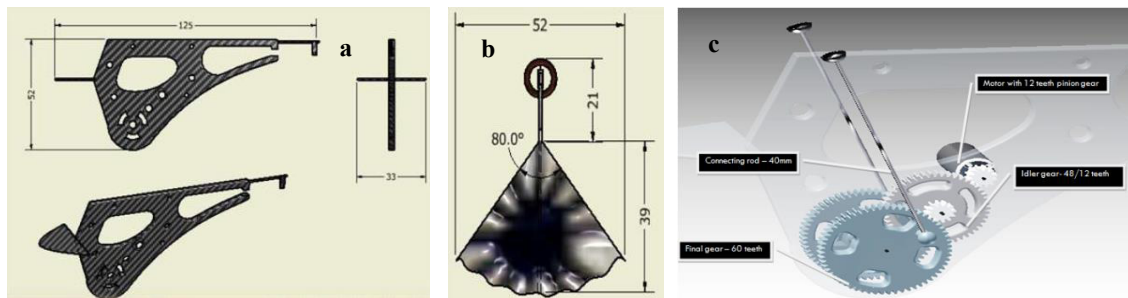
(a) Fuselage design; (b) tail design; (c) drivetrain design
